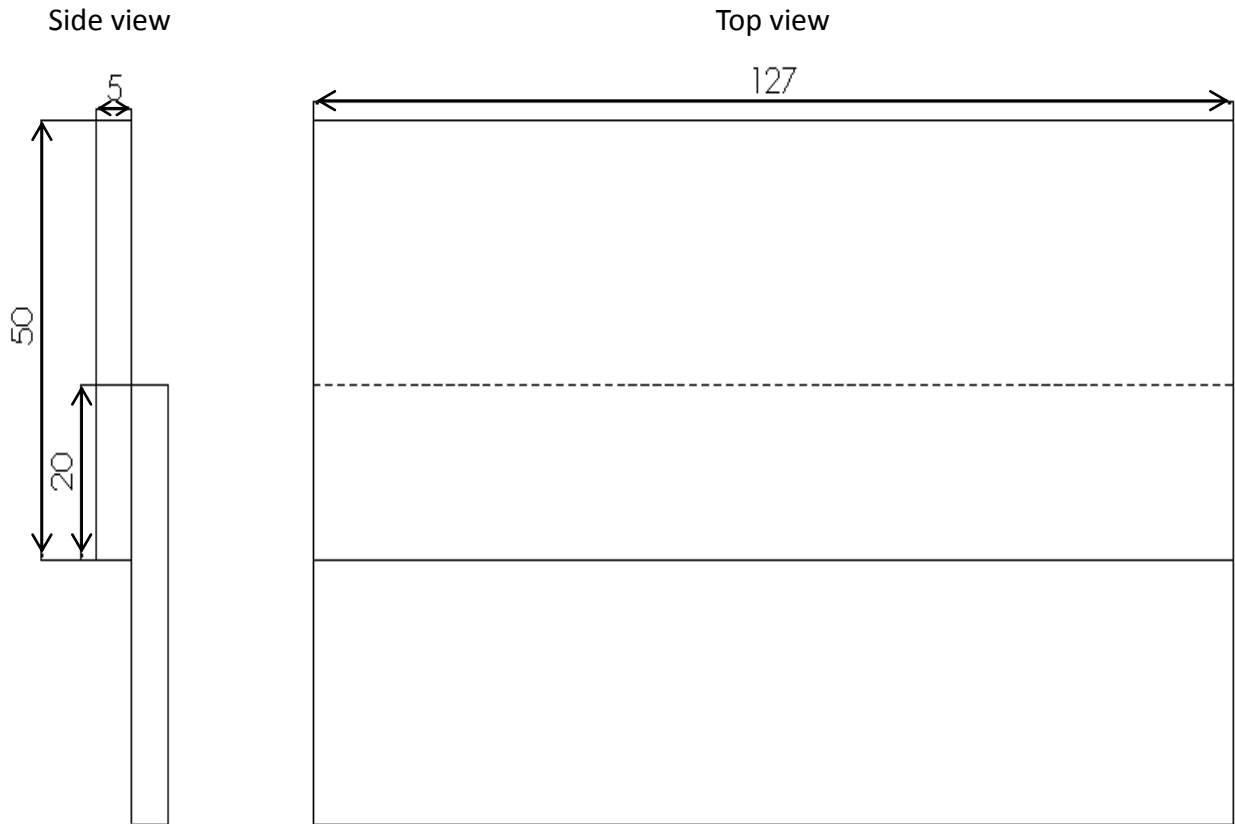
Side and top view of wood specimen assembly. All dimensions in millimeters.
